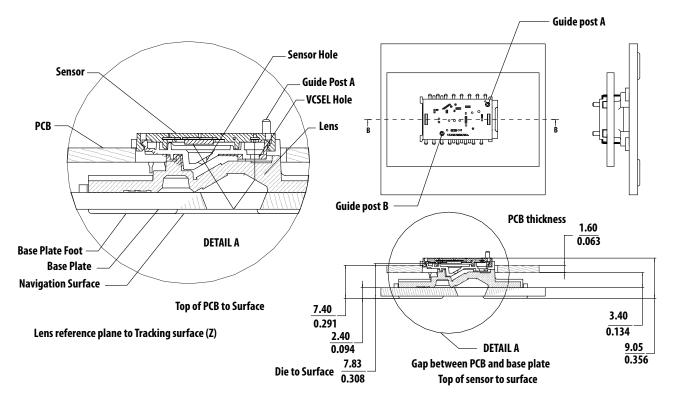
2D Assembly drawing of ADNS-7530 sensor coupled with the ADNS-6150 lens, PCB and base plate (top and cross-sectional view)
